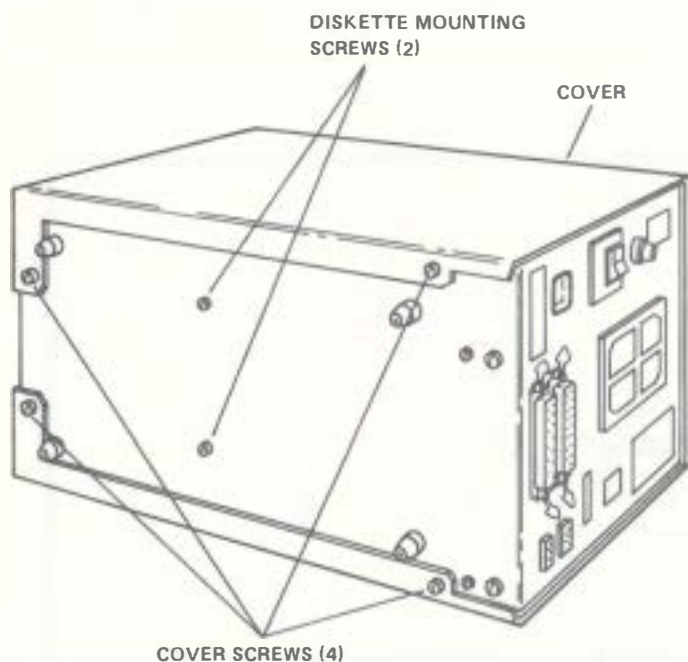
8" Diskette Drive Assembly (Bottom View)
